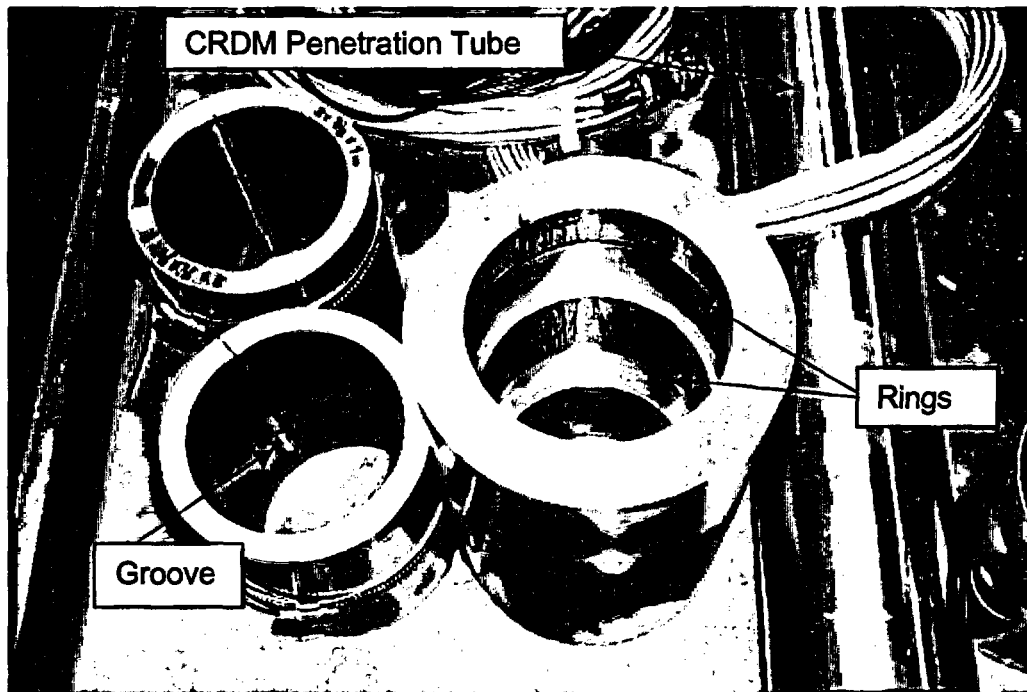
Machined samples used in this evaluation. The samples SK-WB08-1 through - 4 are shown clamped together. The penetration tube was used in the test stand.
